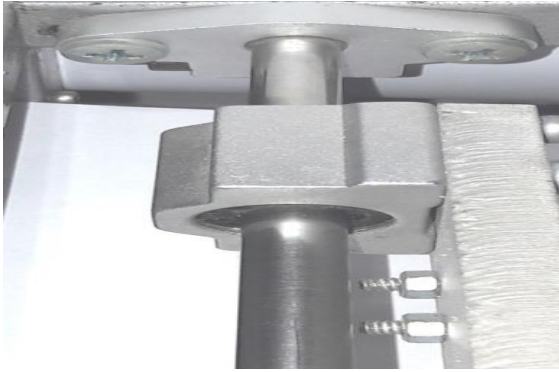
Axes linear shaft, linear bearing and shaft support combination
